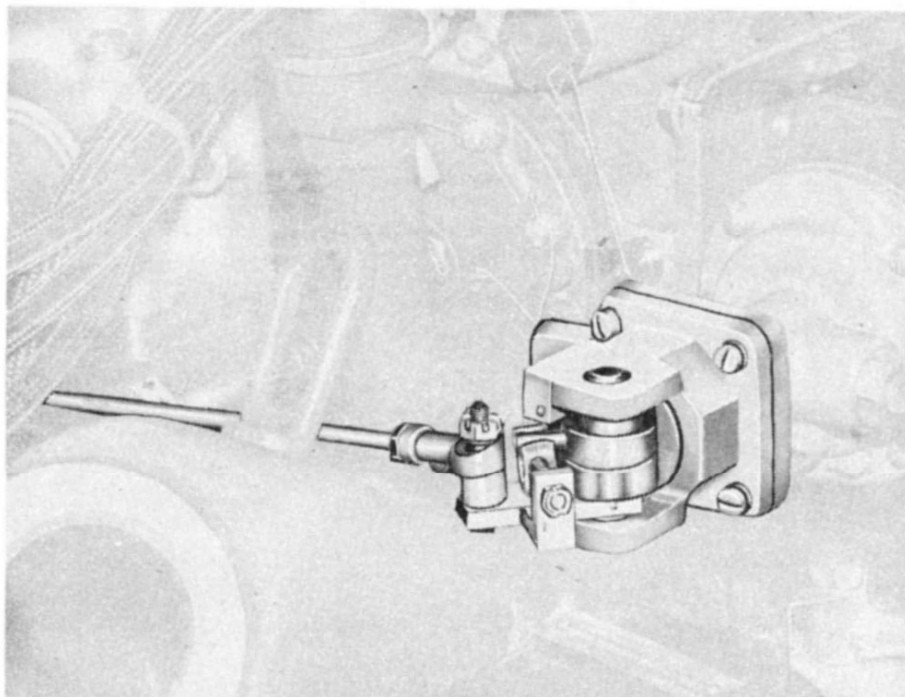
View Showing Controller Connecting Rod Secured To Controller Arm in Full Boost Position
